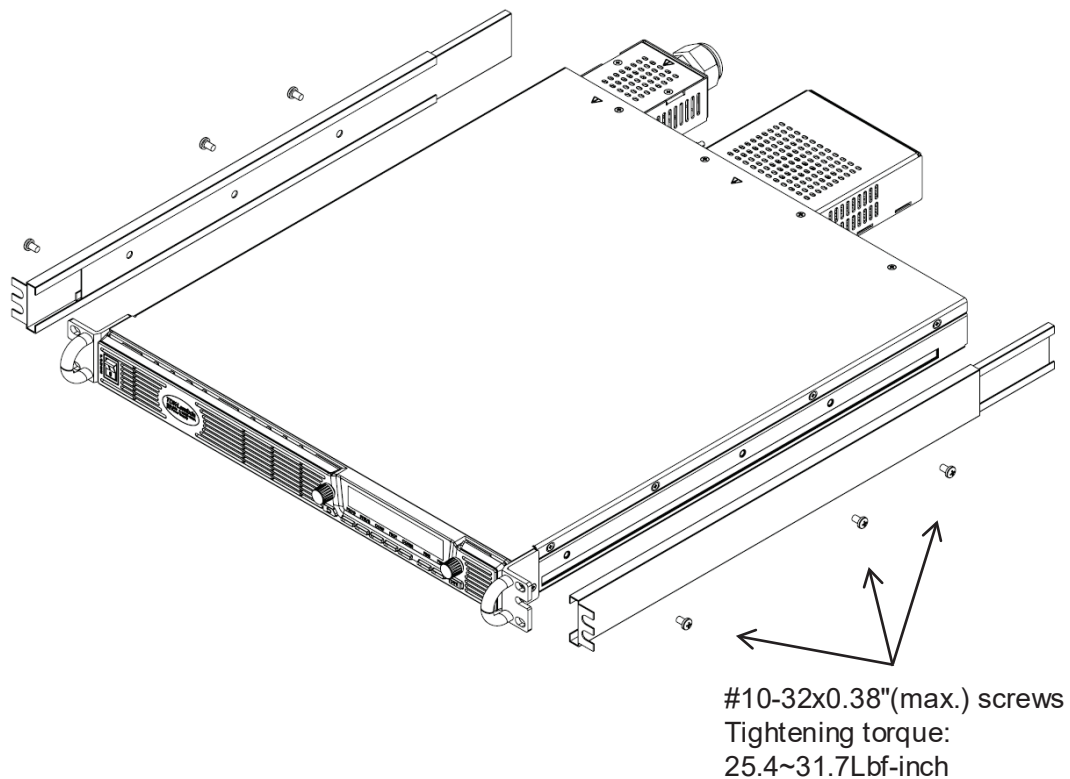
1 – 7.5kW Rack – Mount Slides Assembly
